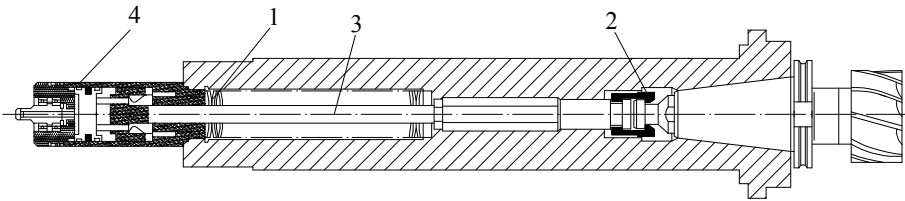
Fixing of tool in the seat of spindle: 1 – set of disk spring, 2 – jaws fixing the tool, 3 – piston rod, 4 – hydraulic drive
